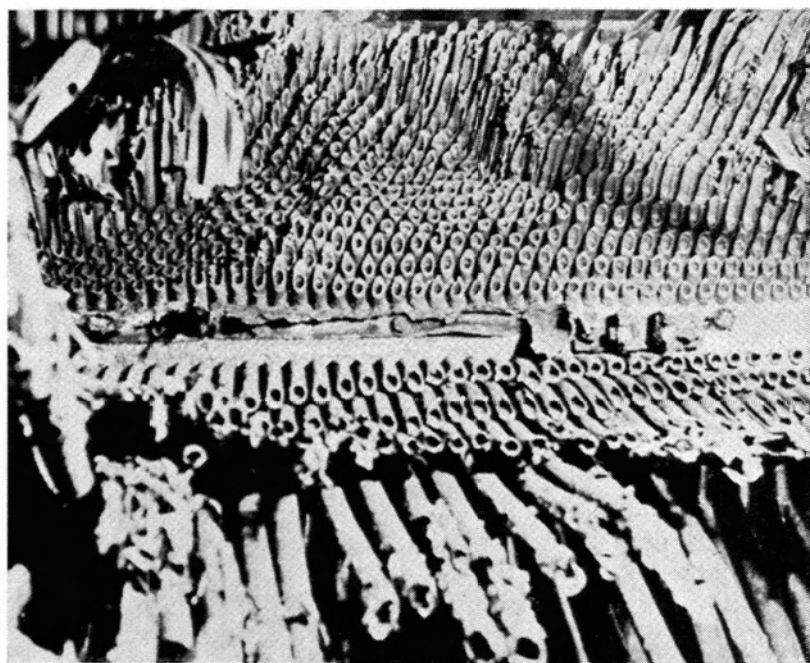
VIEW OF STEAM DRUM SHOWING TUBES BURNT THROUGH
